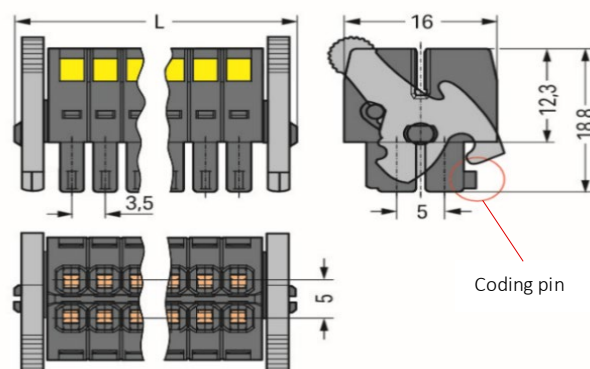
Dimension drawing TC.ACS.RS485 Repeater X1 plug
